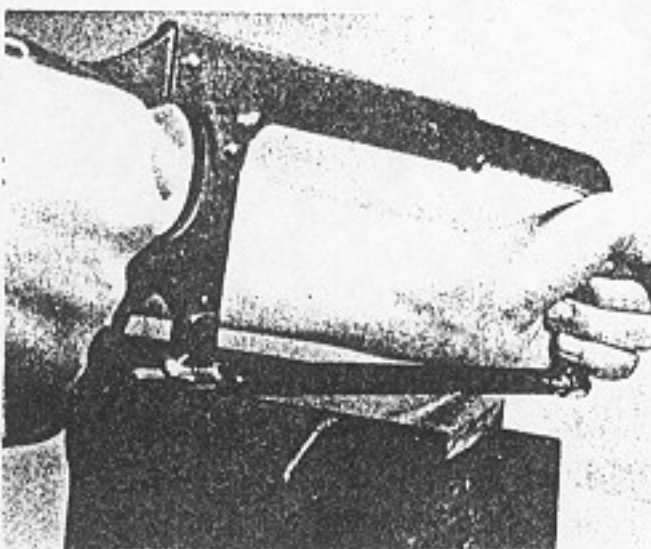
Use less pressure on the saw when the cut is about through the metal.
